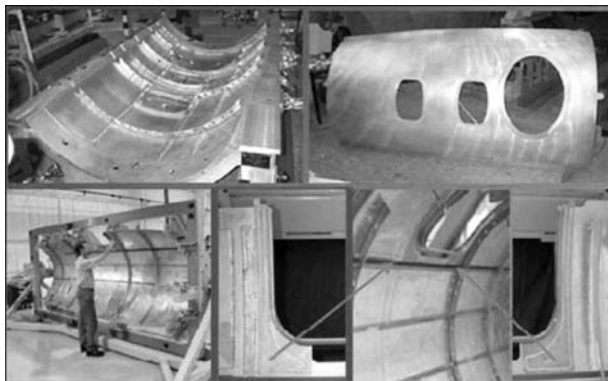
FSW of design components of «Eclipse 500» at the gantry machine tool (access mode: [http://www.plm.automation.siemens.com/en\\_us/Images/Eclipse-fsw\\_tooling\\_tcm1023-21267.jpg](http://www.plm.automation.siemens.com/en_us/Images/Eclipse-fsw_tooling_tcm1023-21267.jpg))
